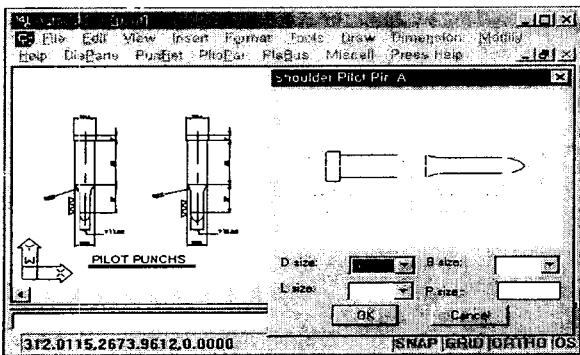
Die component-pilot pin drawing by Auto-CAD and Window environment
